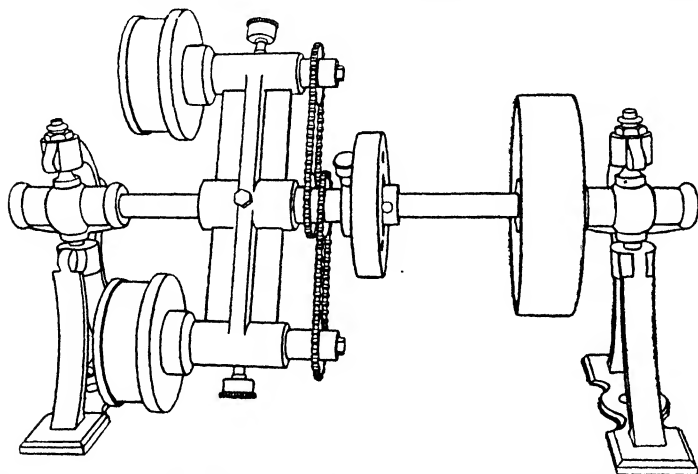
Special grinding machine using the centrifugal principle for producing the convex part of the jewels
